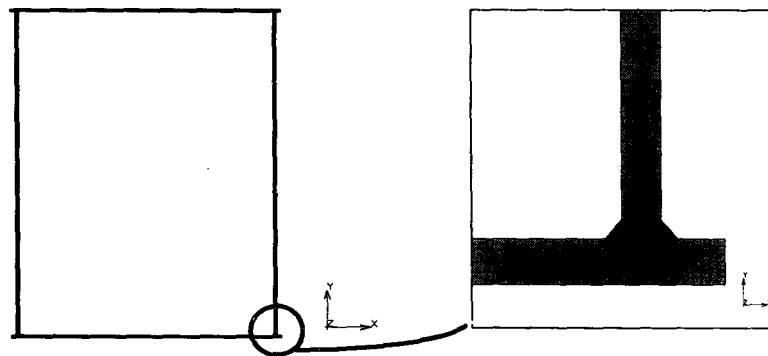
2-D mesh shape of outer frame and fillet weld at the box girder
